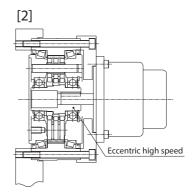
Assembly procedure A series F2C type (assembly example 1)
